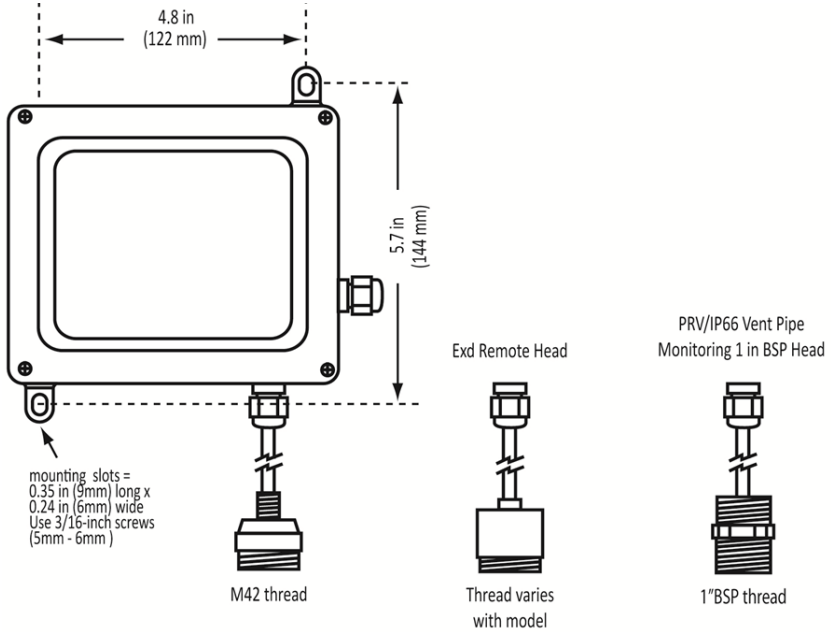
Dimensions of the IAM-100 Standard Housing
